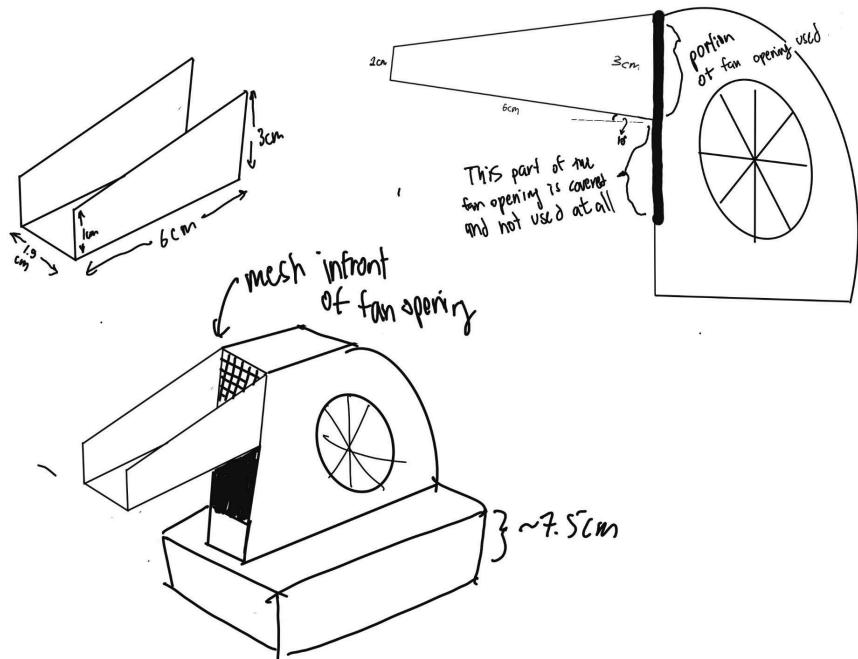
Drawing of Small Ramp & Attachment to Fan
